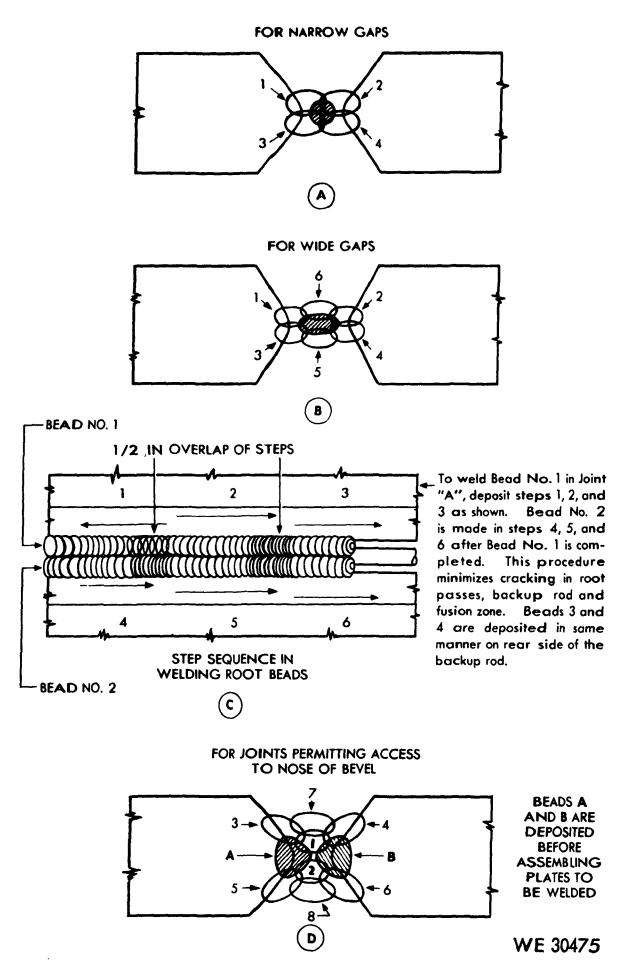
Sequence of passes when depositing weld beads on homogeneous armor plate.
